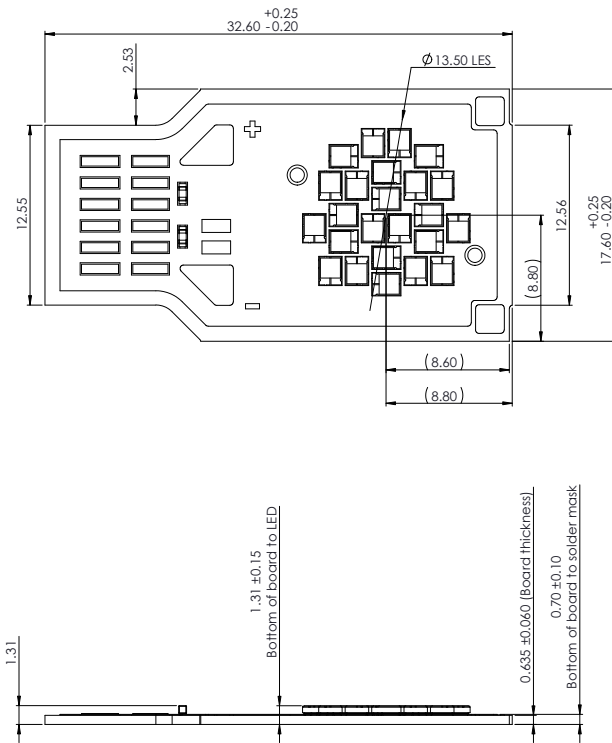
Package outline drawing for LUXEON S3000 / LXSx-Pxxx-0024N (Connector-less).
